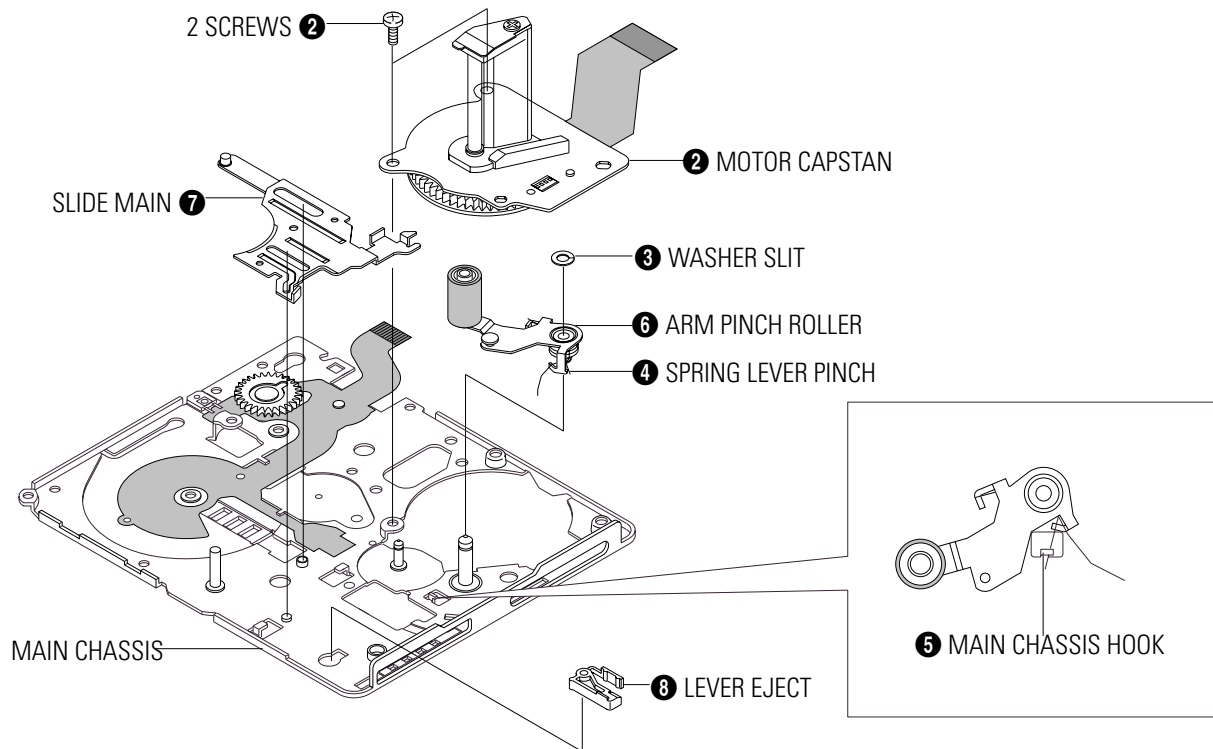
Motor Capstan, Arm Pinch Roller, Slide Main, LeverEject
